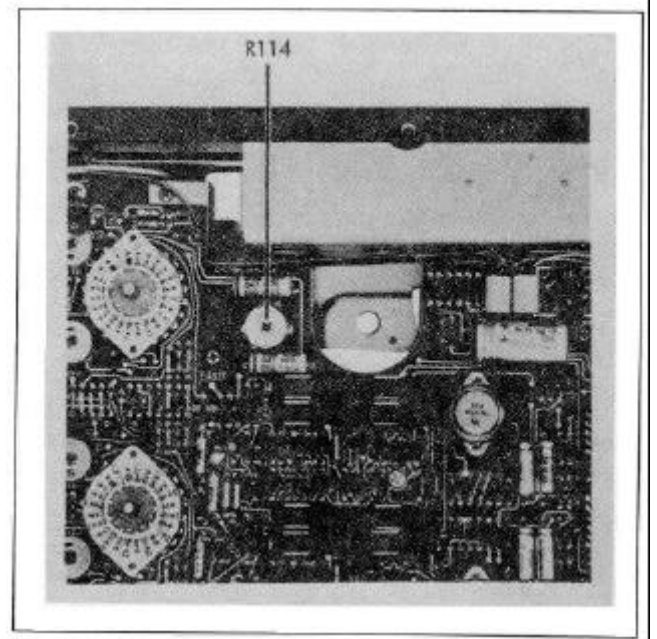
CIRCUIT BOARD ADJUSTMENT
